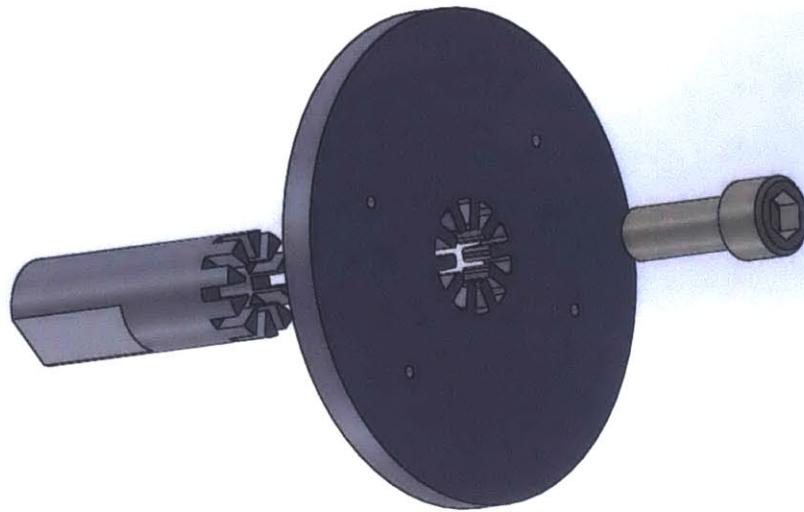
The connector assembly. The machined piece on the left is threaded onto the bicycle axle, and the bolt is then threaded into the other side, locking the assembly in place.
